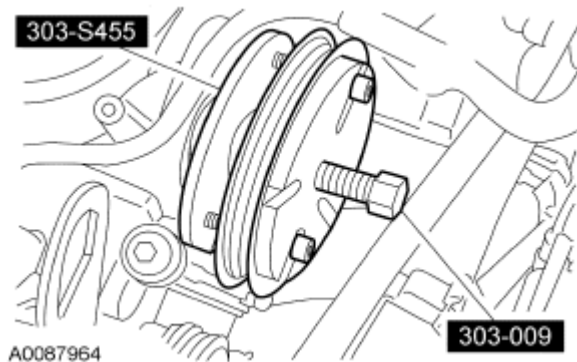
Removing Coolant Pump Pulley Using Special Tools (303-009, 303-S455)
